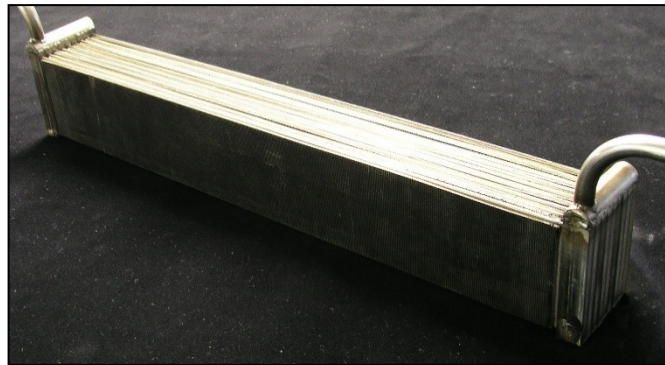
View of a fully assembled heat exchanger core manifolded as described in this section.
